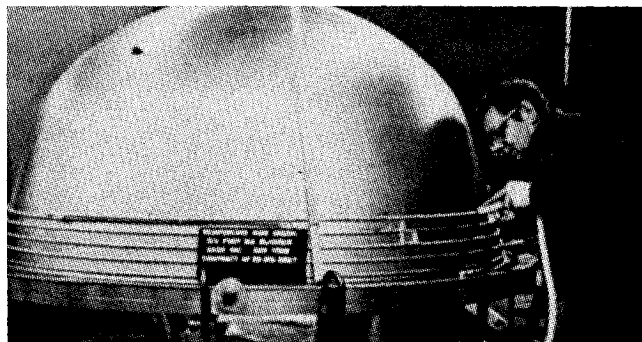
Tack welding wires to 72-in. diaphragm shell.
